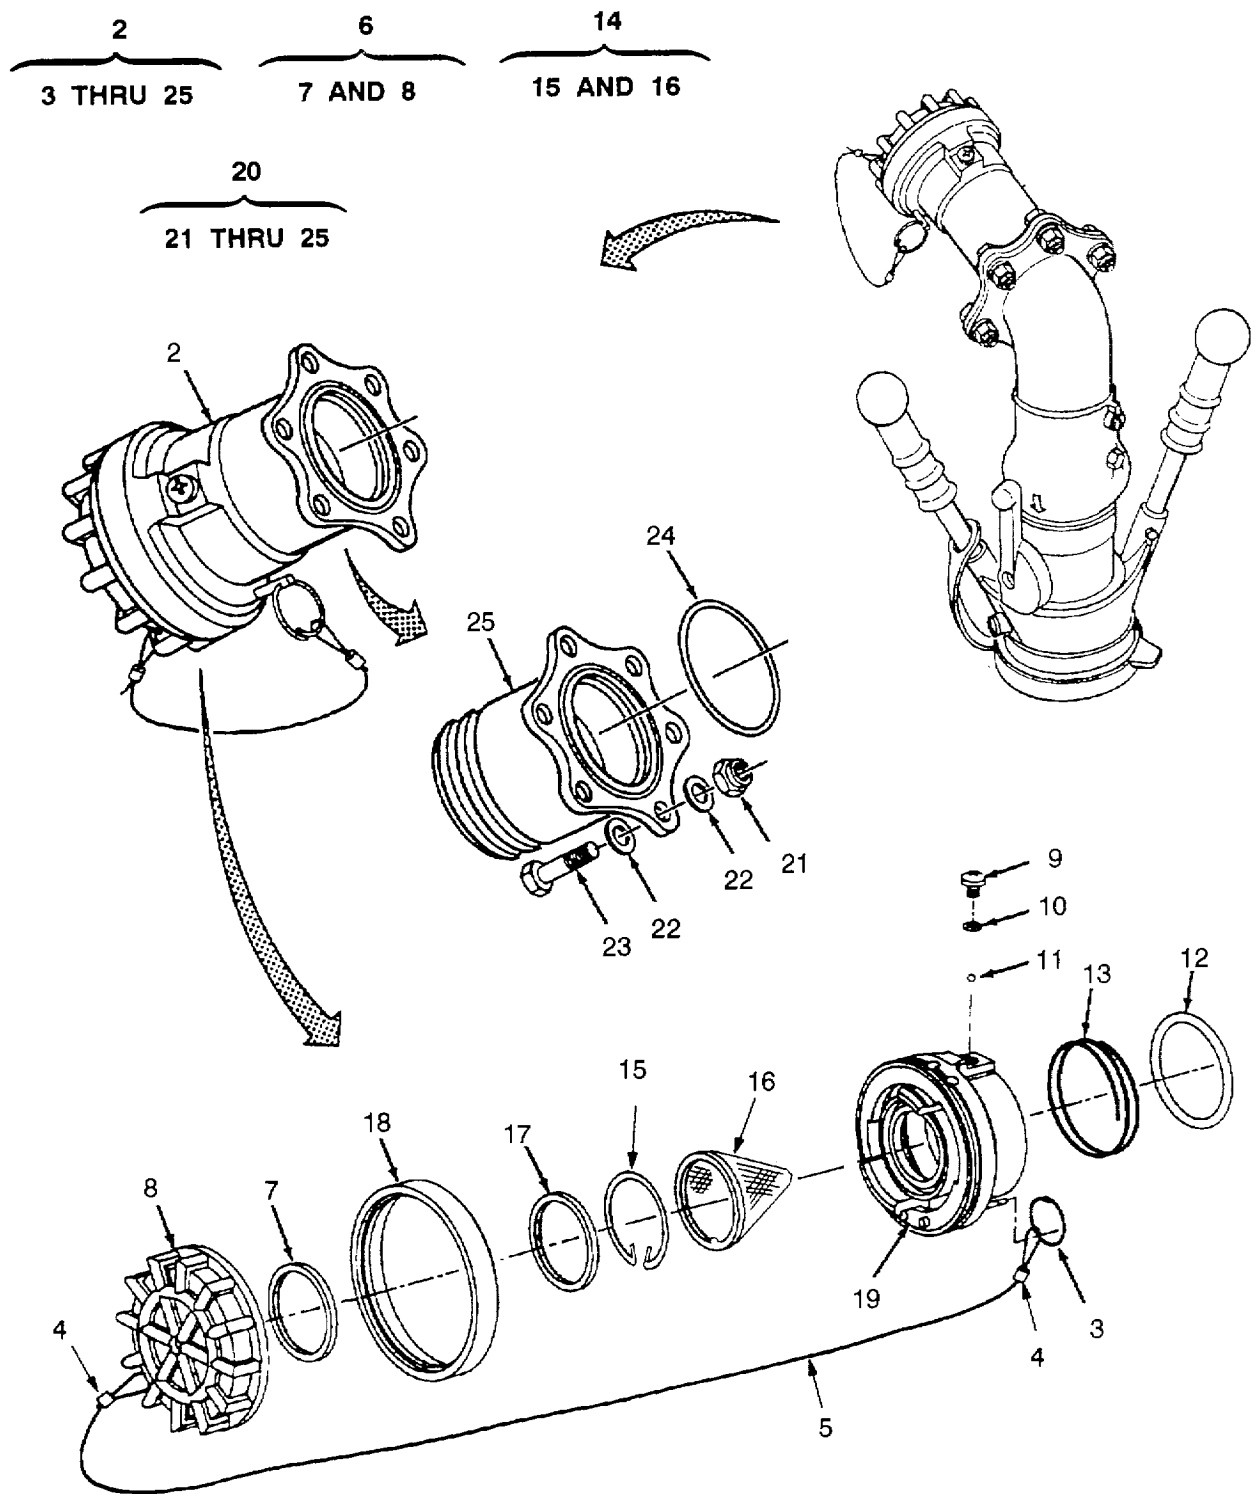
A. Pressure Fueling Nozzle Assembly (HTARS101) (Sheet 2 of 6)
